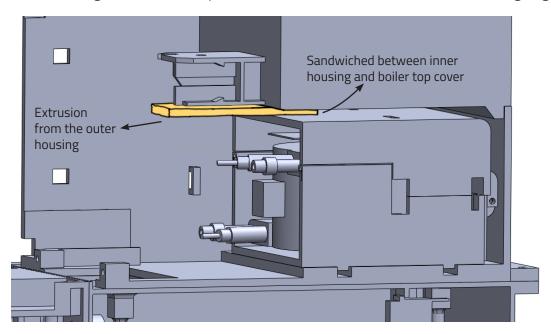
Boiler in the original location with a projection from the housing inserting itself between the boiler and the inner housing
